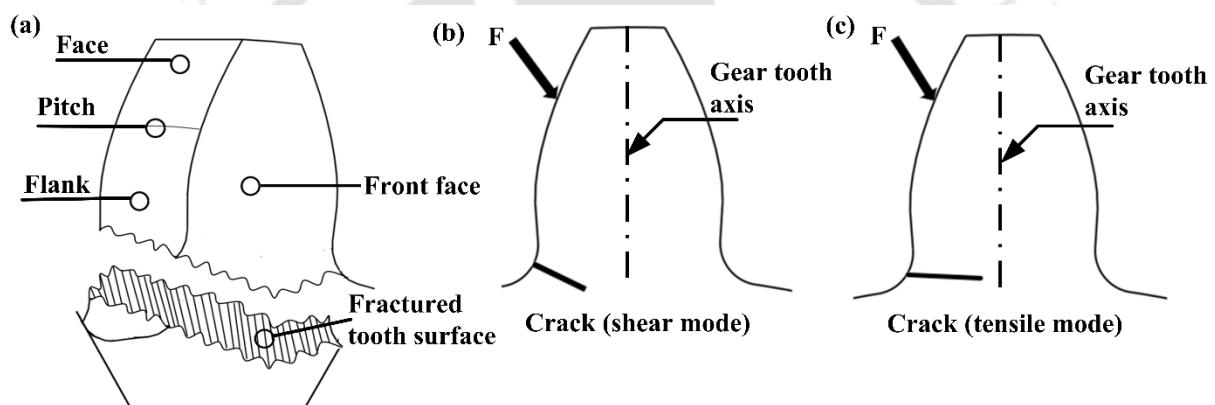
(a)–(c) Schematic of various gear tooth regions, fractured surfaces, and root crack modes
